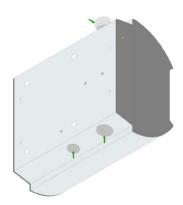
Locations of cable entry points in ENELION WALLBOX.
